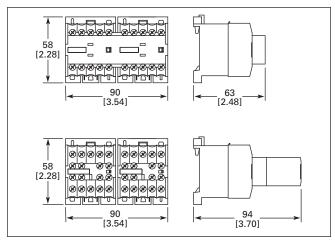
XTMCXML Mechanical Interlock — Approximate Dimensions in mm [in]
